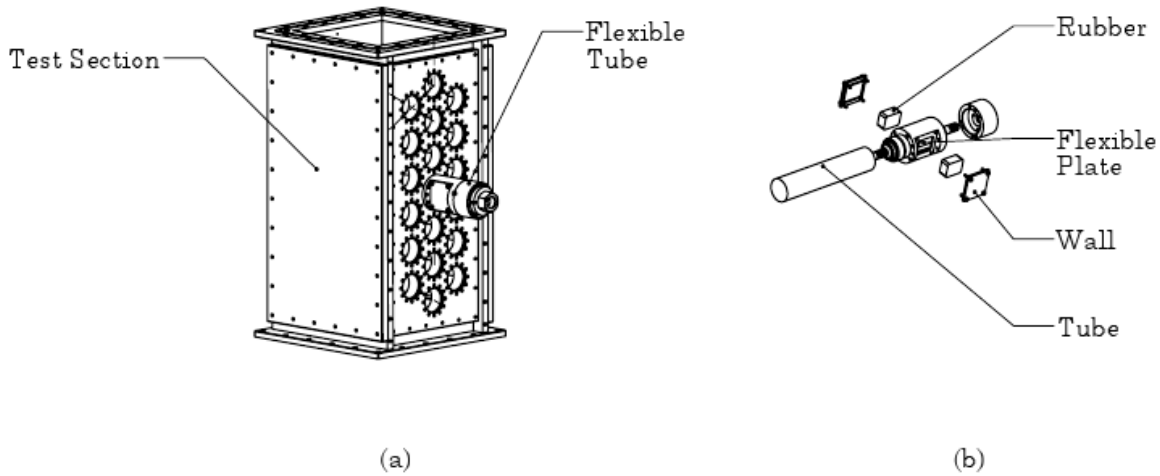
Flexible tube and test section: (a) Rubber damping system, (b) Flexible tube mounted on test section
